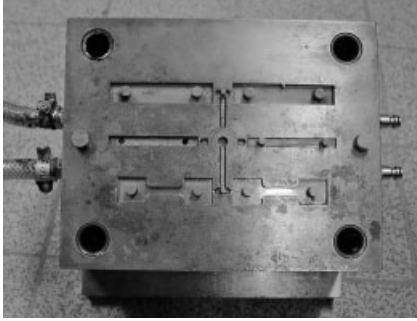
Injection mold for the ARBURG 220H90-350 injection machine.
